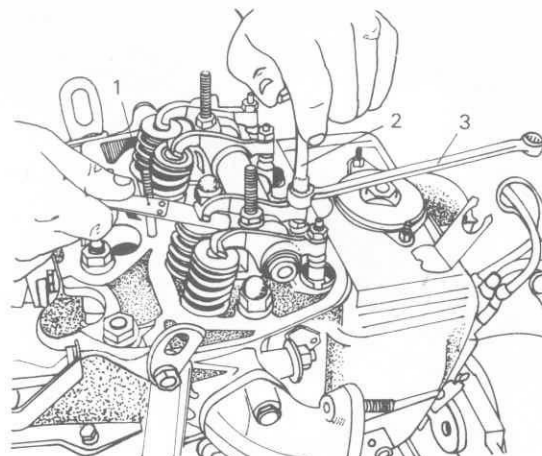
14 Adjusting valve clearances using feeler gauge 1, adjusting screw wrench 2 and locknut ring spanner 3
